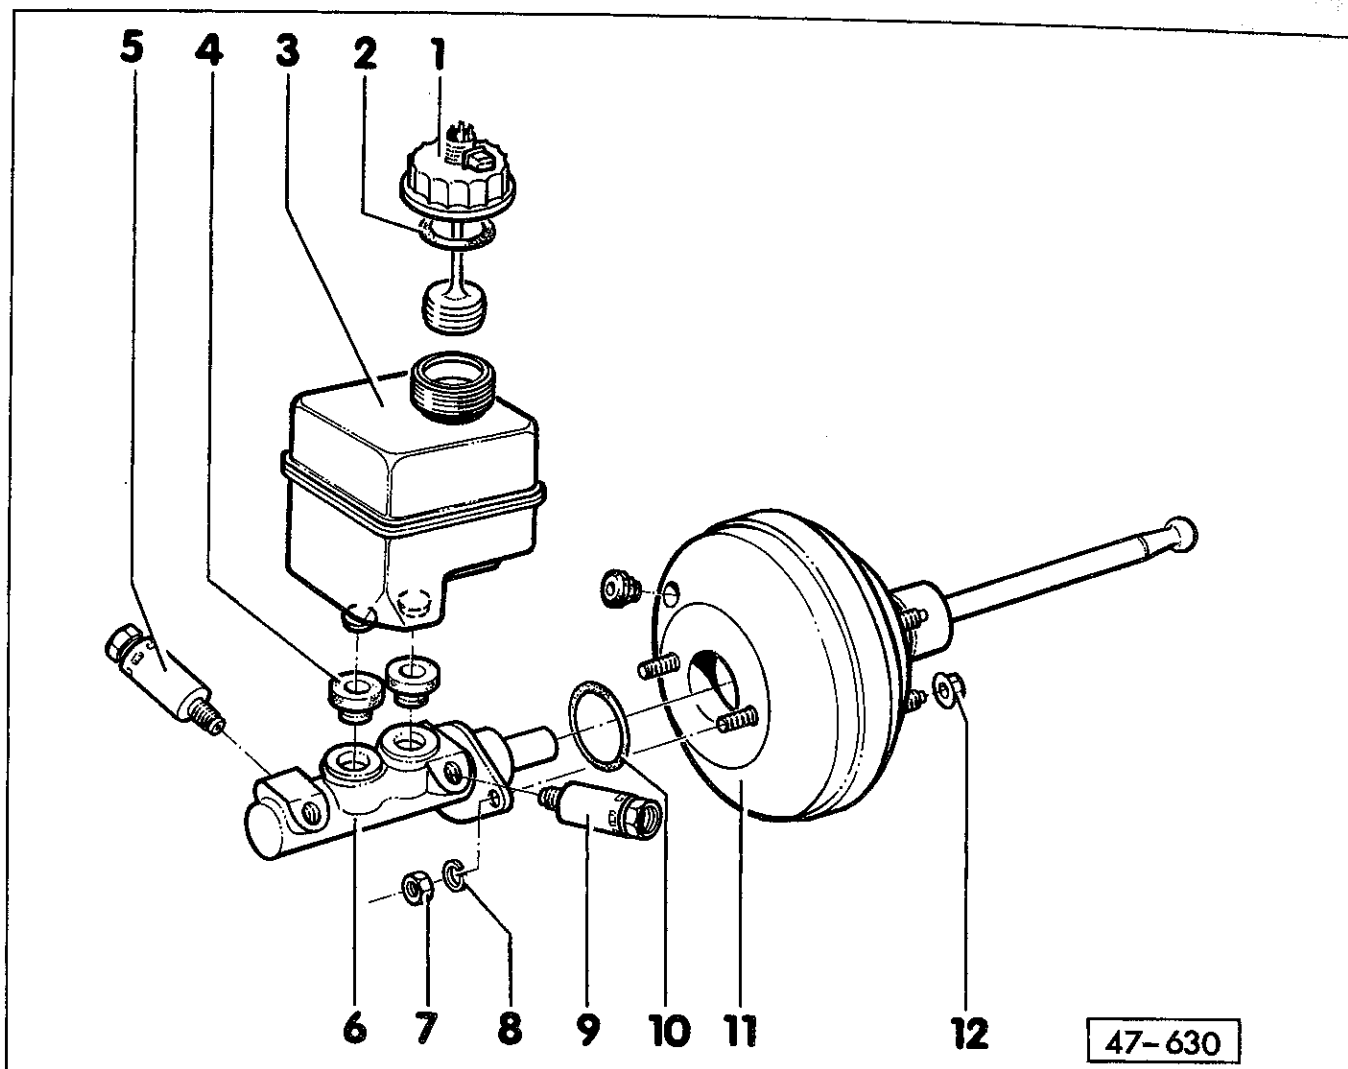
Exploded view of master cylinder and vacuum booster for cars without ABS.
